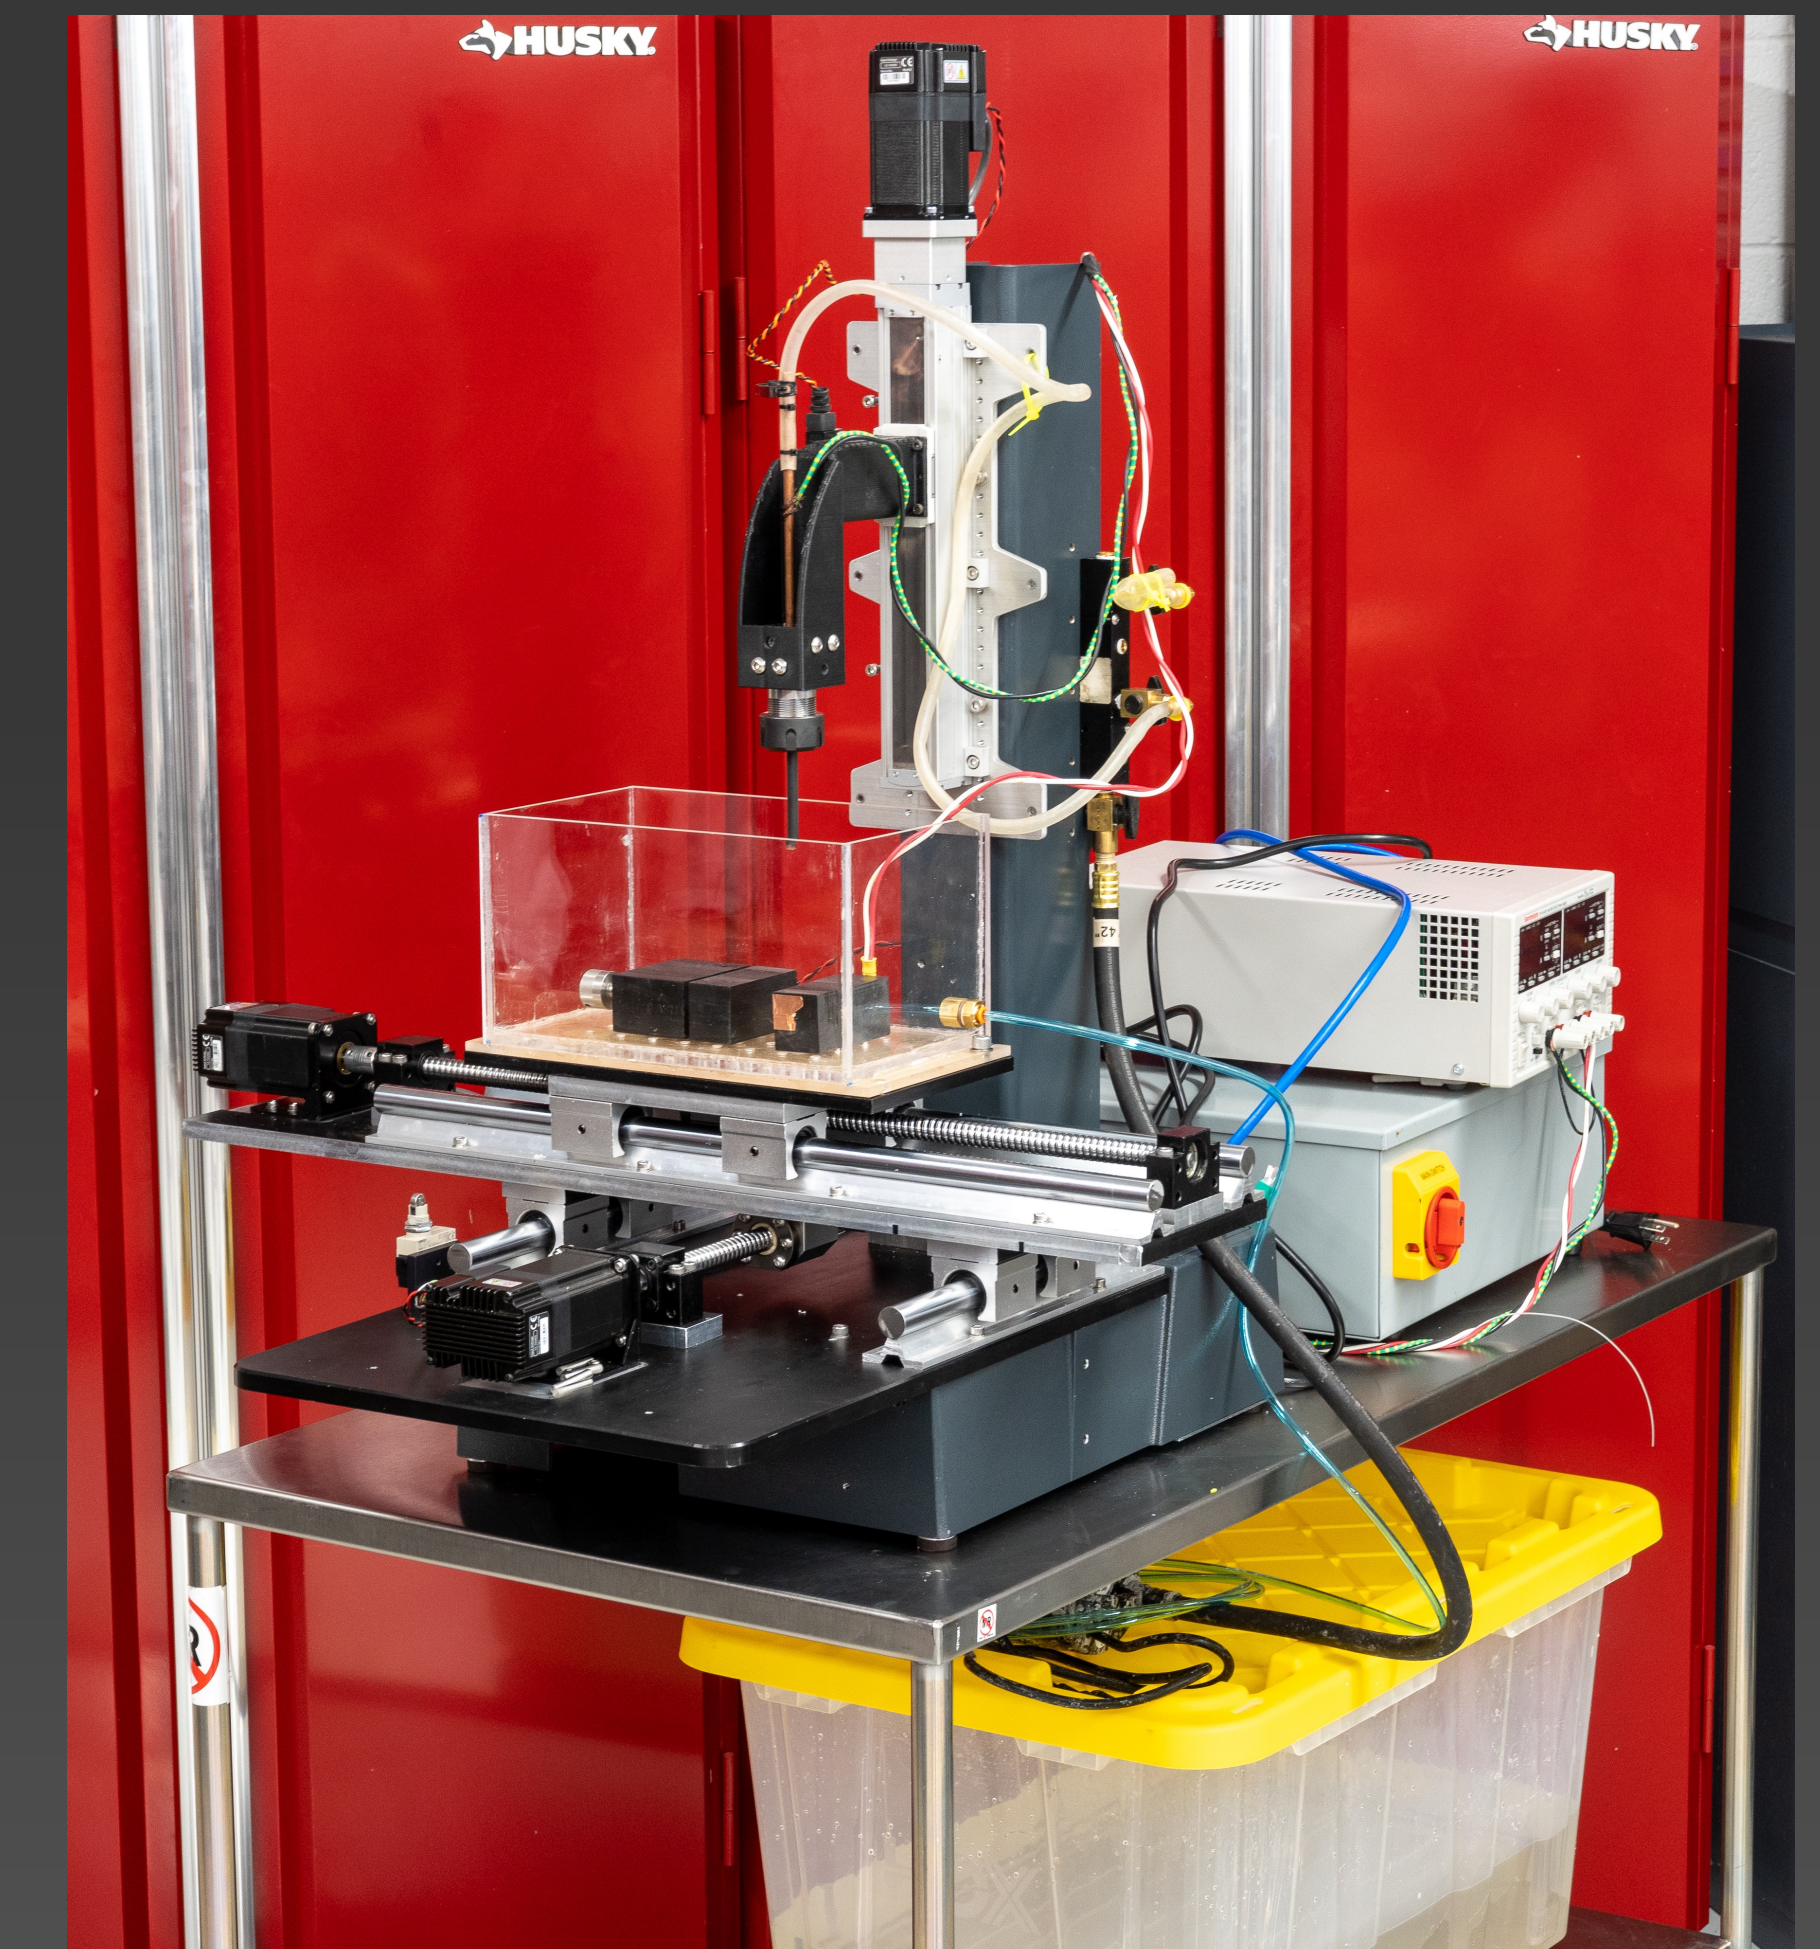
Image of final assembly of CNC ECM machine tool. Portrayed in this assembly are the mechanical components, full frame assembly, electrical power supply, and chosen fluid circulation system.
